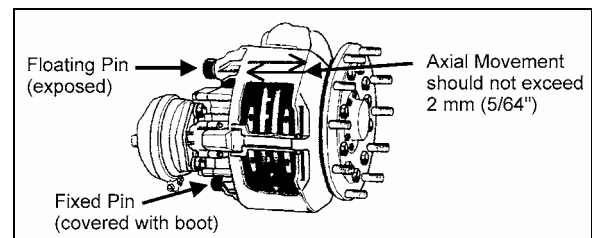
CALIPER AXIAL MOVEMENT 12132
